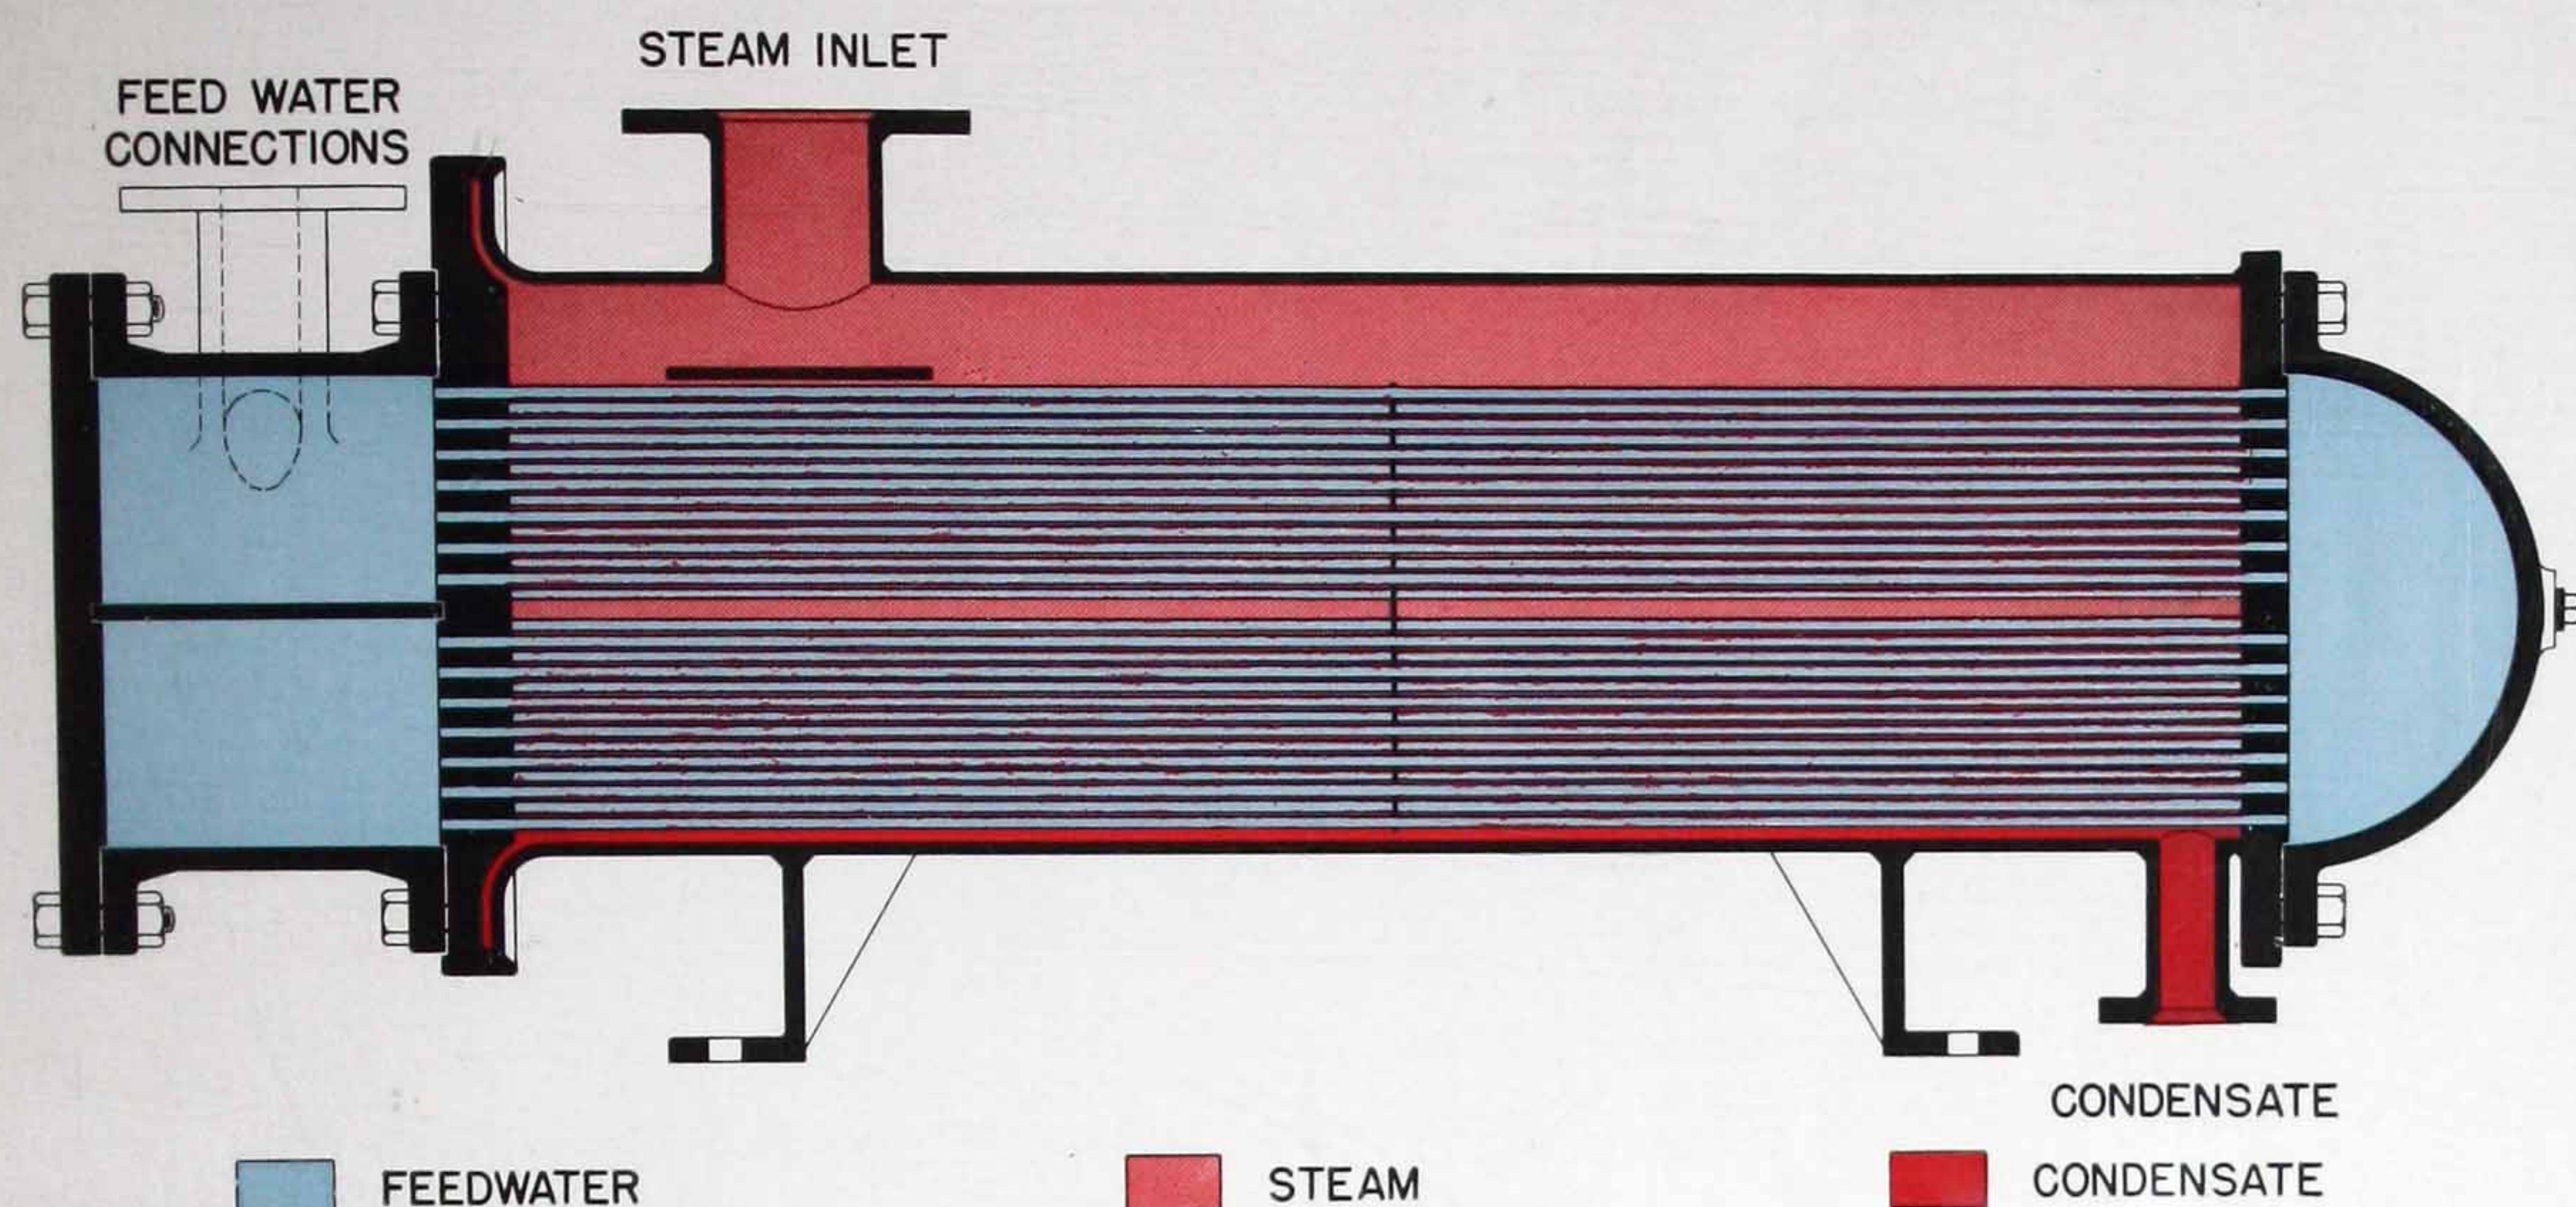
⌘ BOILER FEED WATER HEATER WITH STRAIGHT TUBES
